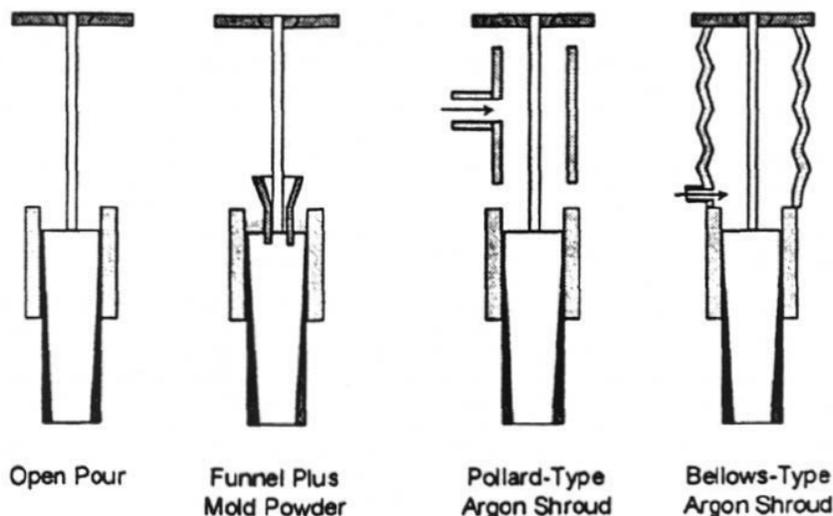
Some systems for shrouding the tundish stream with inert gas in casting with metering nozzle [6].
